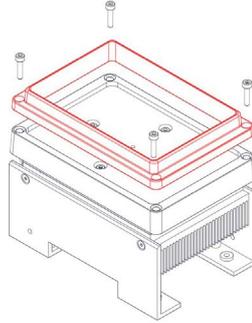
· Unscrew the 4 screws at the corner and remove mounting frame
